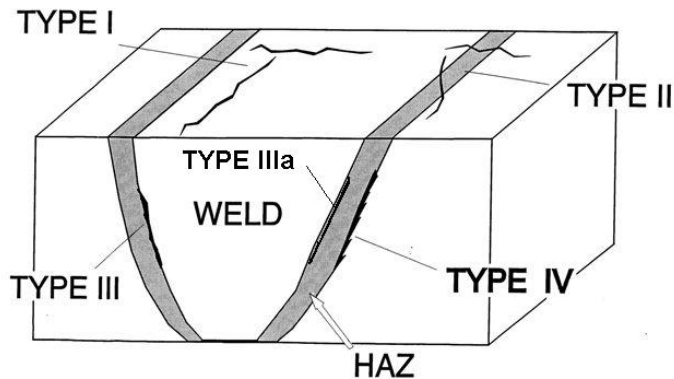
1 – Schematic showing cracking locations on large butt welds
